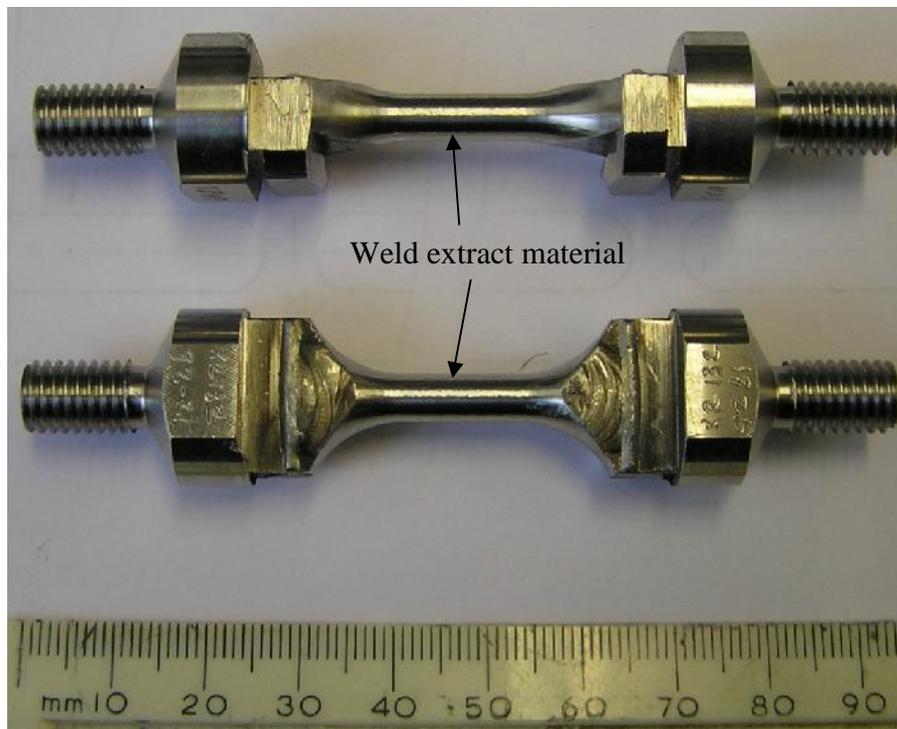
Two pass weld material specimen, extracted from longitudinal welded plates.
